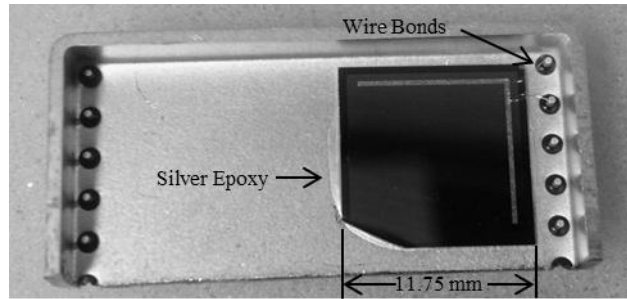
A CNCC emitter chip installed onto a package with silver epoxy.
